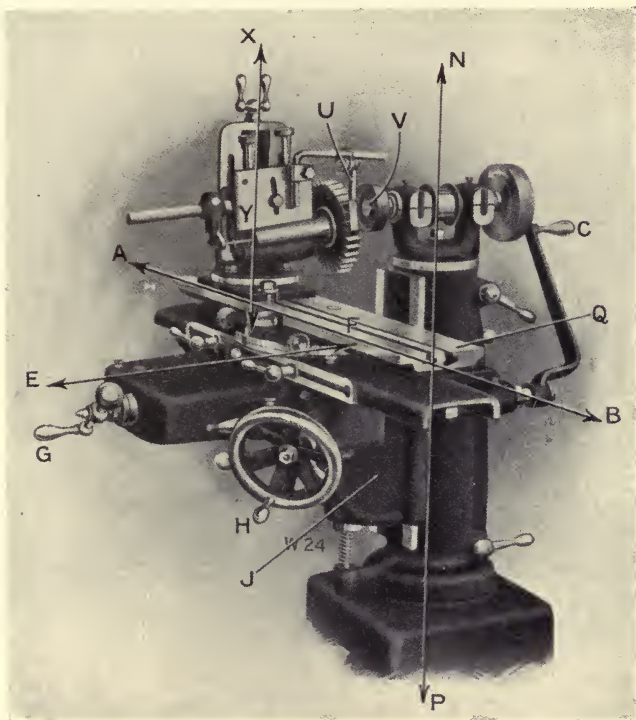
LE BLOND CUTTER GRINDER. USE OF CUP WHEEL
